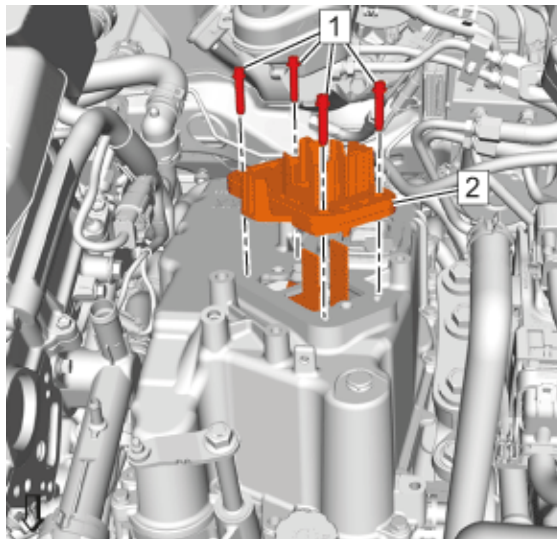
Drive Motor Battery Positive And Negative Cable Connector And Bolts
